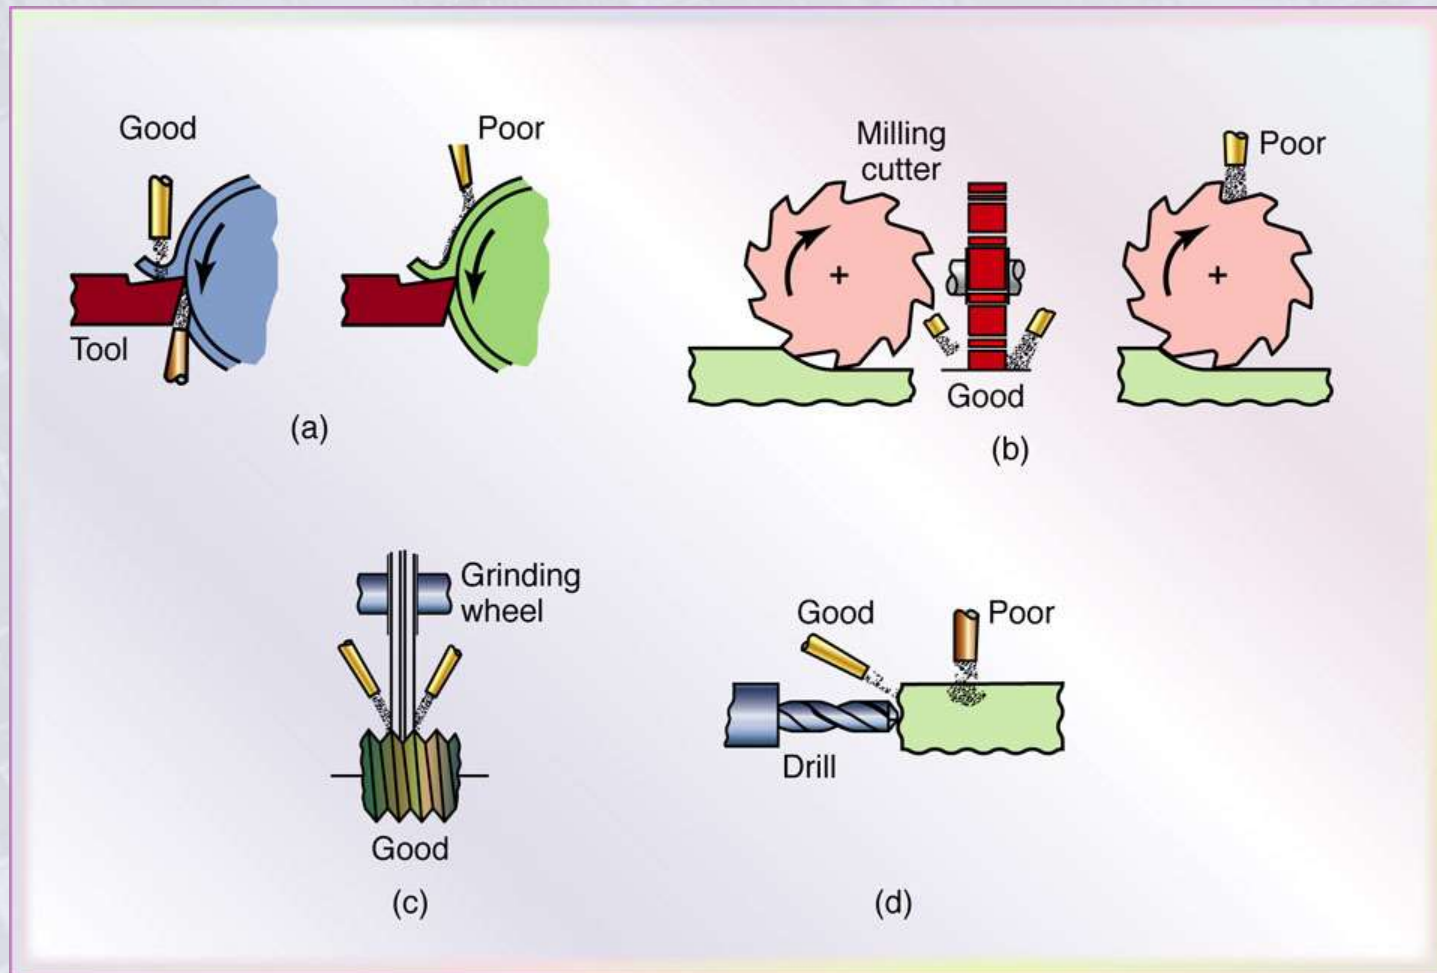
Schematic illustration of the proper methods of applying cutting fluids (flooding) in various machining operations: (a) turning, (b) milling, (c) thread grinding, and (d) drilling.
